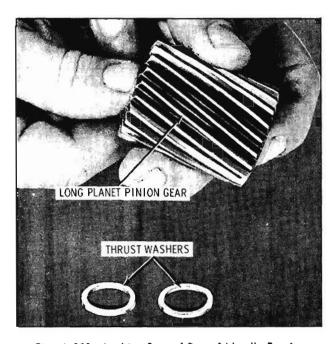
Locking Second Row of Needle Bearings thrust washer. Turn the pinion shaft so the groove faces the center of the planet carrier. (Fig. 6-399)
